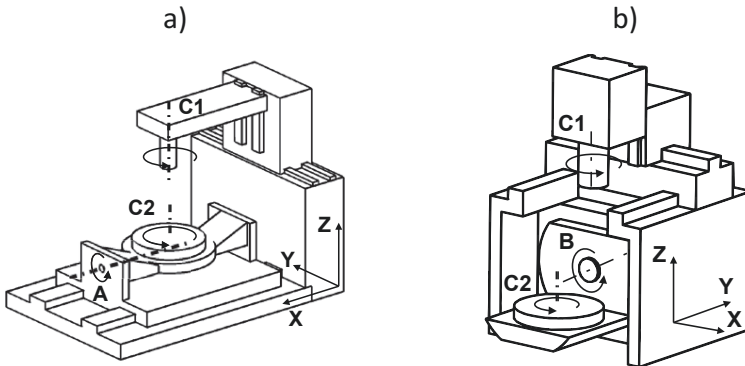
Schematic of 5-axis machine tool (a) A/C, adapted from [11] (b) B/C, adapted from [14]
